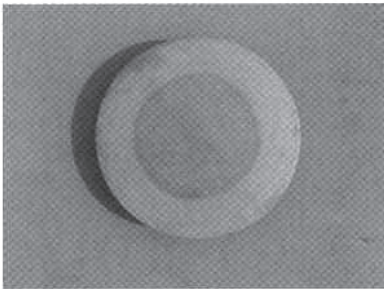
Some examples of transverse section (Forging ratio= 3.0 S)
